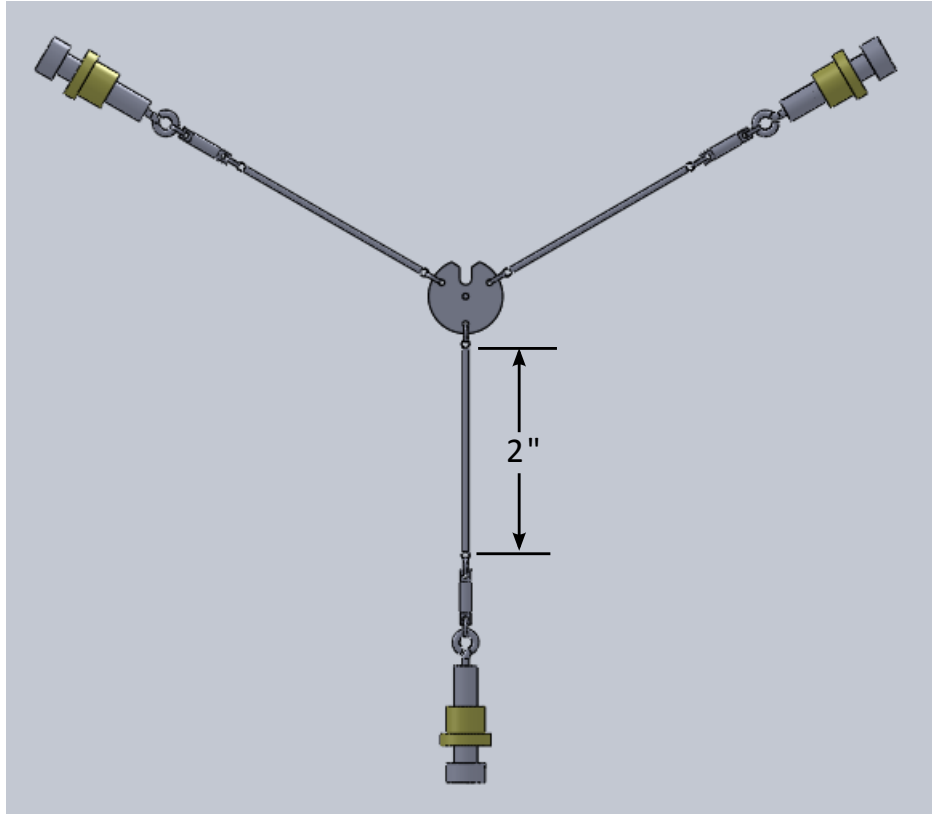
Final design of the spring assembly. Three extension springs are attached to the center hub at one end and a swivel with ultra-fine adjustment screw at the other. Drawn to scale.
